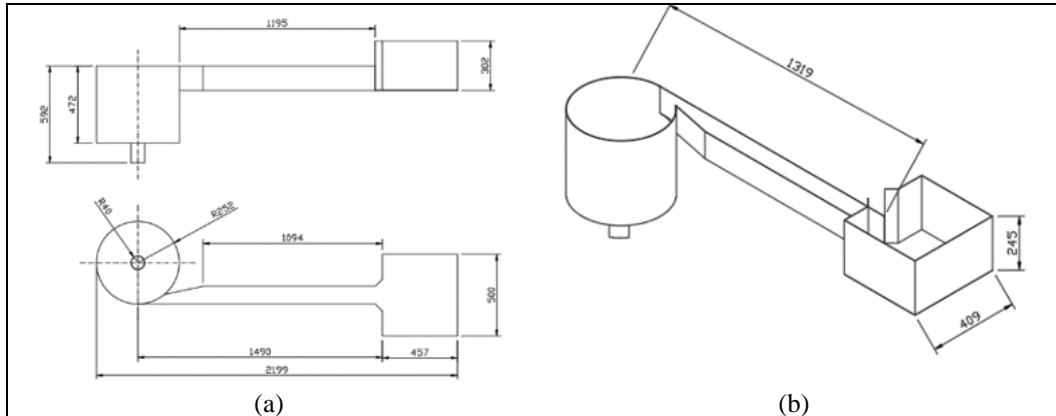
Basin and canal: (a) orthographic view, (b) isometric view. All dimensions are in millimeters.
